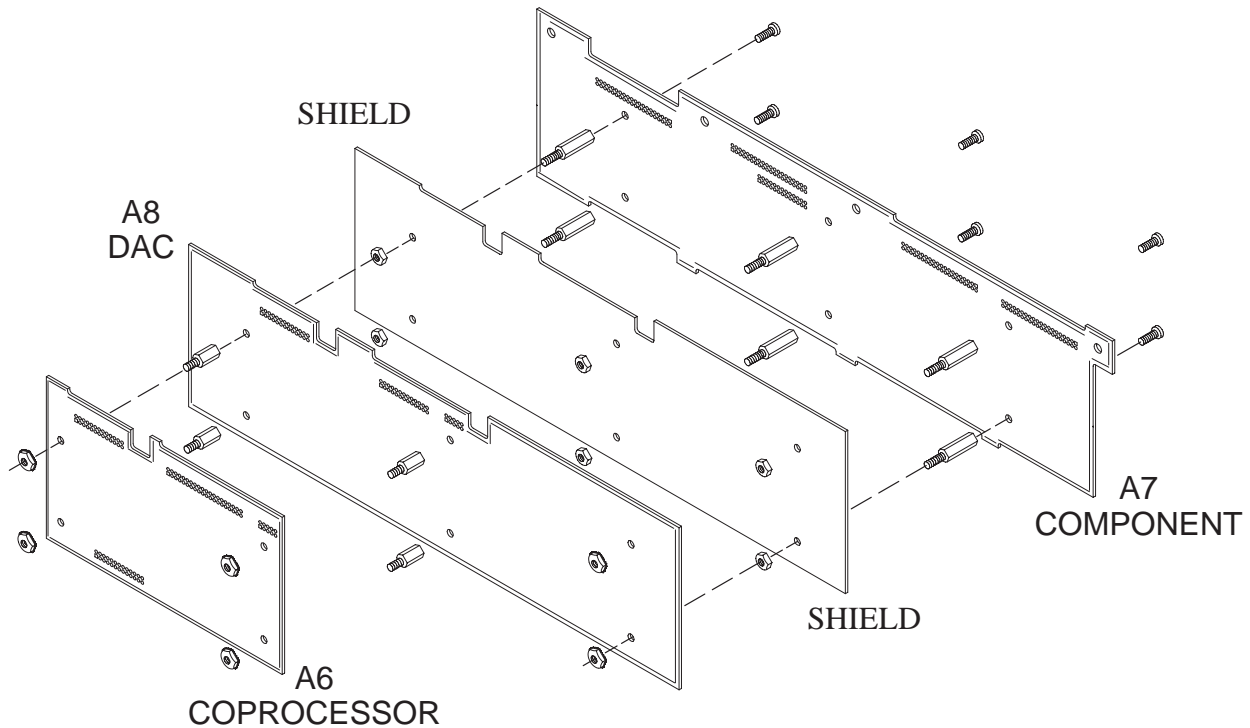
Separating the Component, Coprocessor, and DAC Boards
